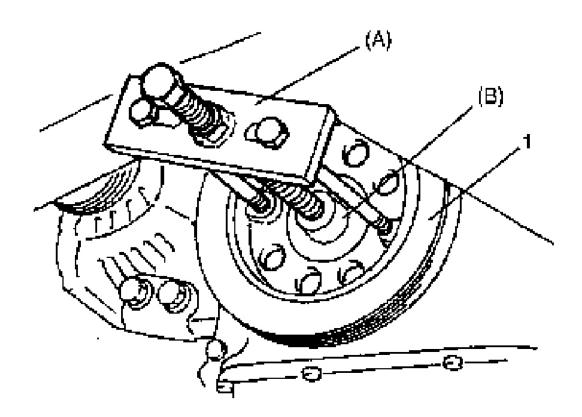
Installing Tool To Crankshaft Pulley Courtesy of SUZUKI OF AMERICA CORP.
